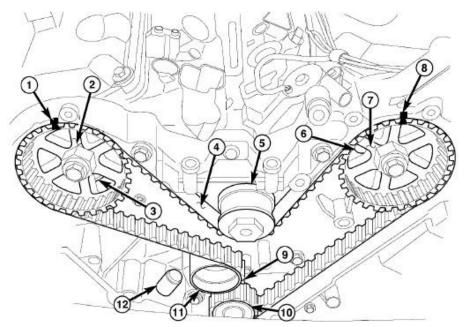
Timing Gear Components Courtesy of CHRYSLER LLC
